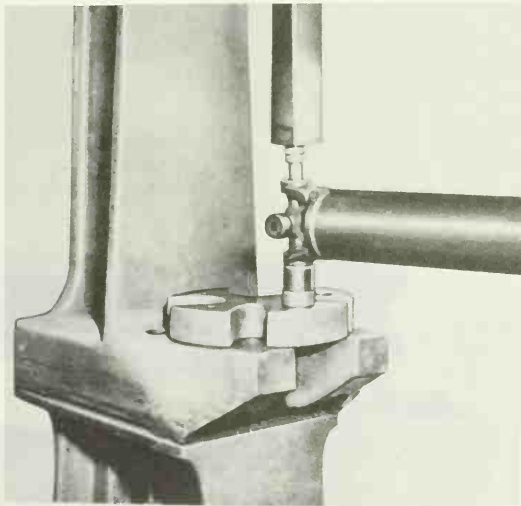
Removing a bearing assembly with a press and sockets. (Chevrolet Motor Division of General Motors Corporation)
